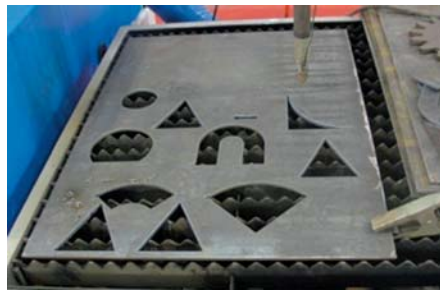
Wide variety of patterns cut using laser cutting machine
